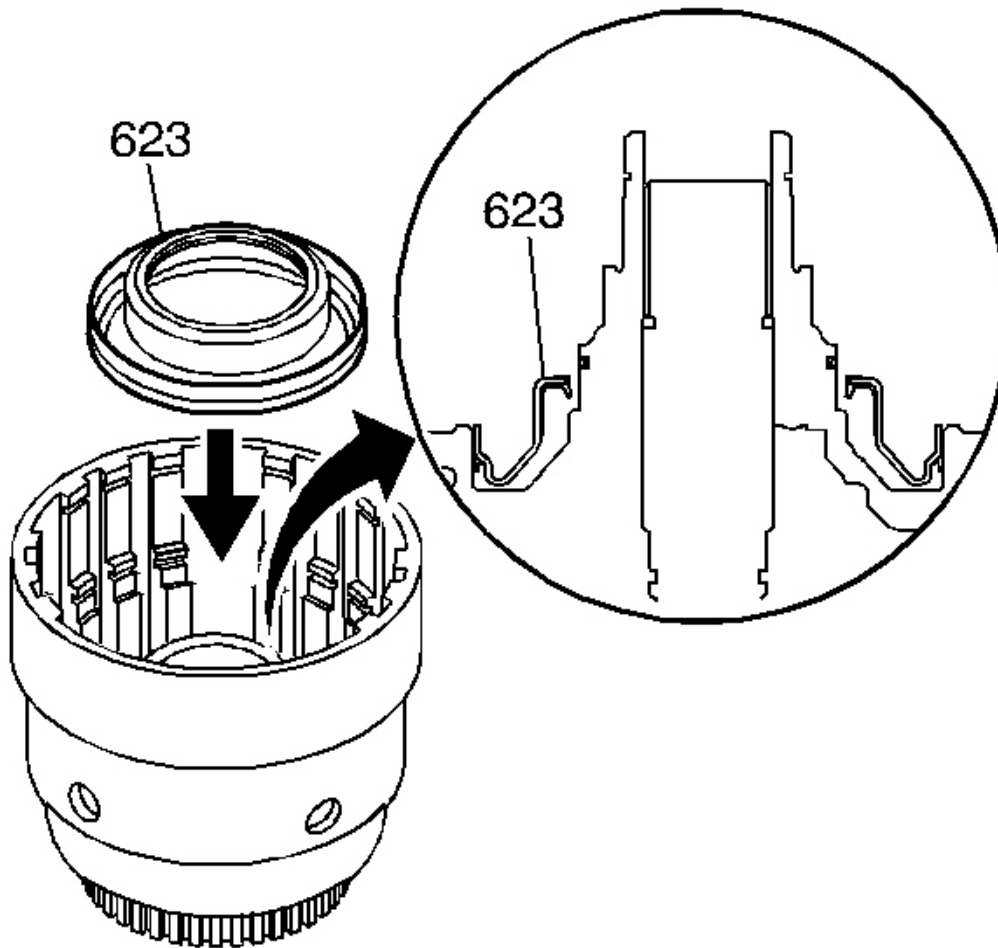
Identifying 3rd & 4th Clutch Piston Inspection Areas
